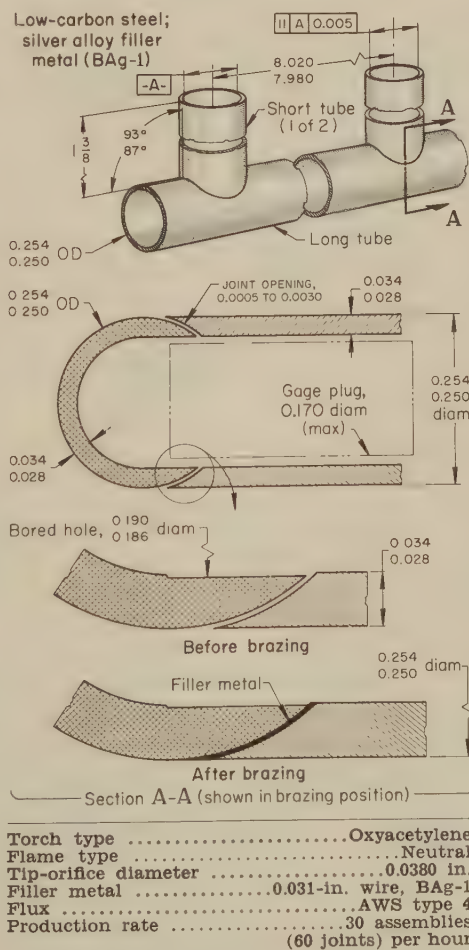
Tubing assembly that met airtightness requirements and close dimensional tolerances after brazing (Example 577)
